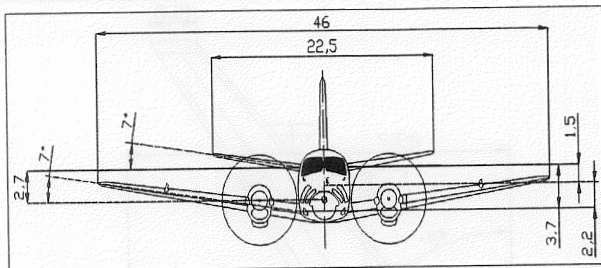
Front CAD View of the Beech 99 Aircraft
